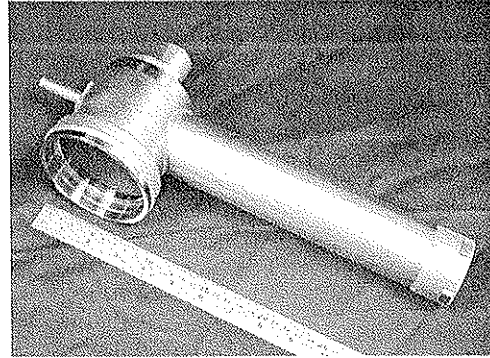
LC Ti-6Al-4V integrated boom/housing, after initial machining.
